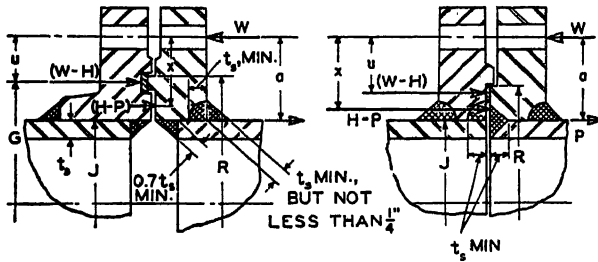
Recessed or Protected Gasket Flanged Fittings.
